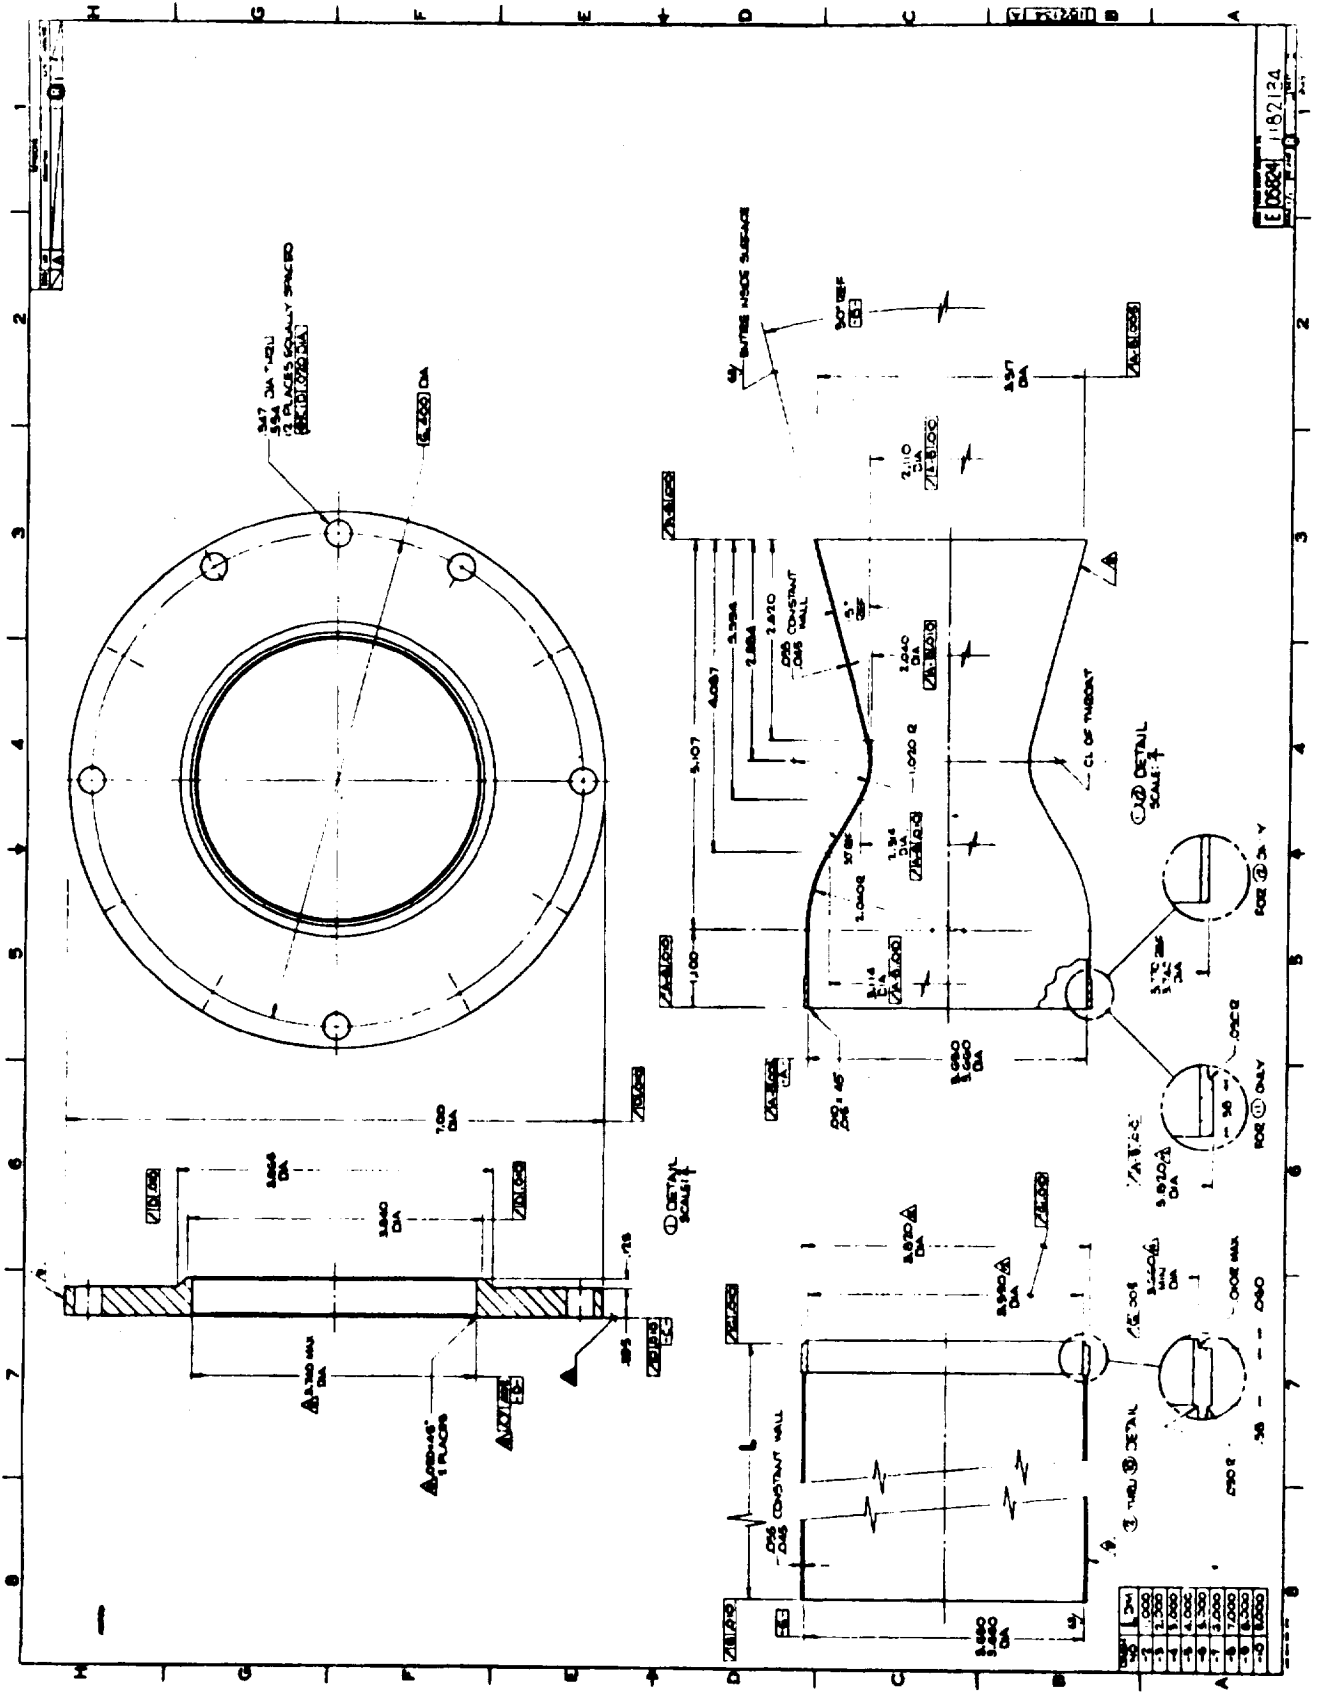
Film Cooled Chamber Design, P/N 1182134 (Sheet 2 of 2)
